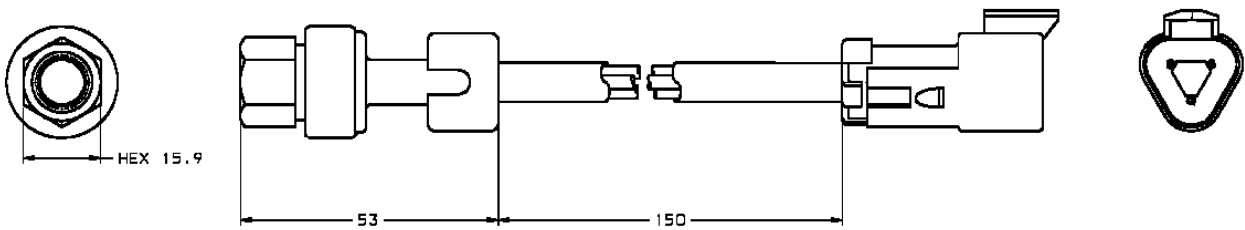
Auxiliary Pressure Sensor 161-9932
